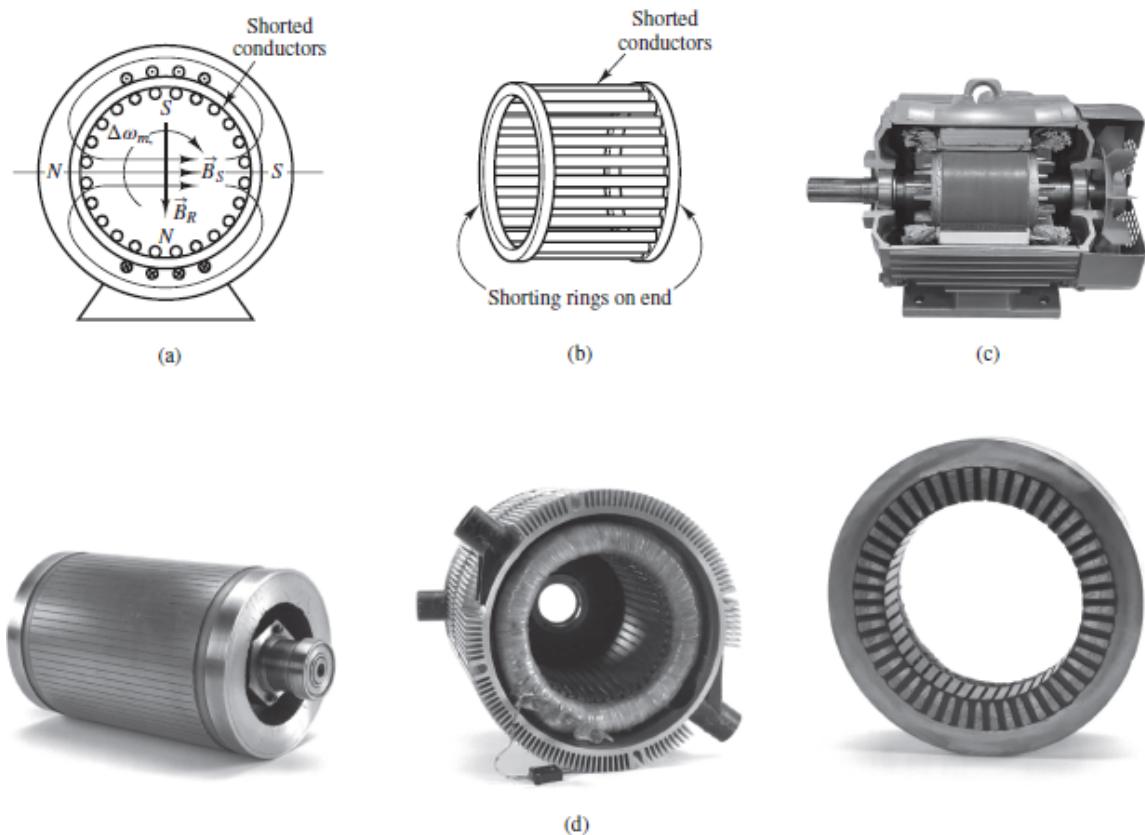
(a) Squirrel cage induction motor; (b) conductors in rotor; (c) photograph of squirrel cage induction motor; (d) views of Smokin' Buckeye motor: rotor, stator, and cross section of stator ((c) *Normal Life/Shutterstock*; (d) *Courtesy: David H. Koether Photography*)
